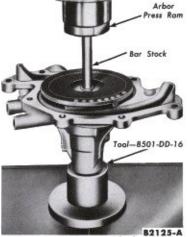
Pressing Shaft Out of Impeller and Pump Housing—Comet
